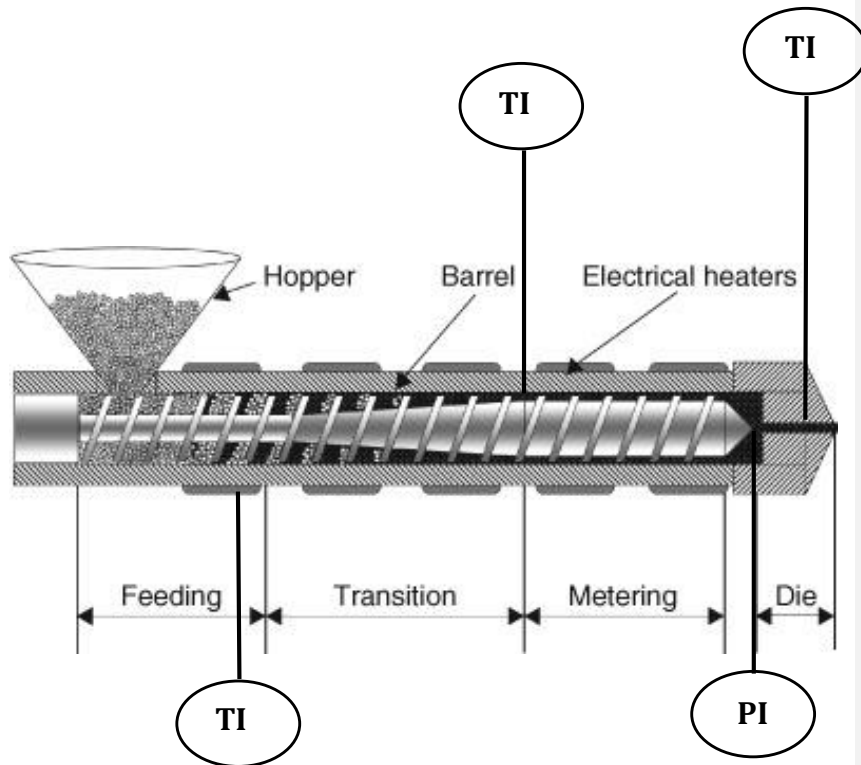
Schematic of the extruder assembly. TIC = temperature-indicating controller, PI = pressure indicator. The die is cylindrical, 12.5 mm long by 2 mm inside diameter.
